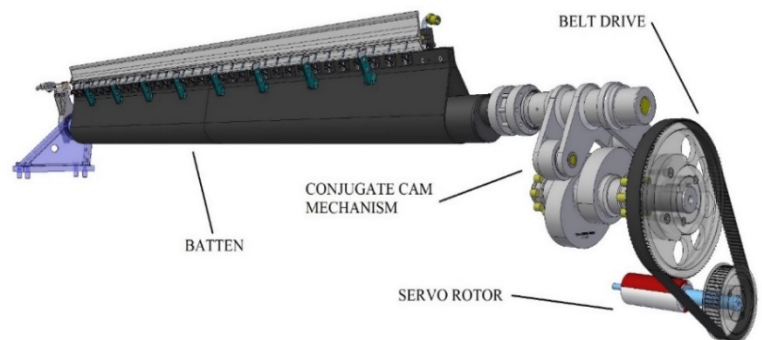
CAD model of DIFA weaving machine slay mechanism.
